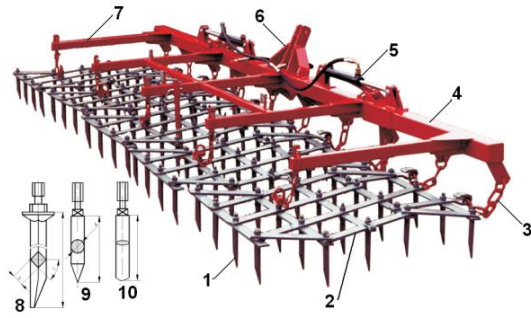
Mounted spike-tooth harrow: 1 - tooth; 2 - frame; 3-chain; 4 – main frame; 5 - hydraulic power cylinder; 6 - hitching device; 7 - holder; 8 - a square tooth; 9 - a tooth with a circular cross-section; 10 - flat tooth
